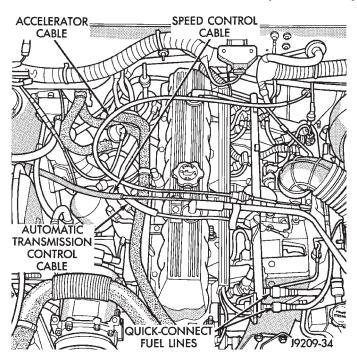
Accelerator Cable, Vehicle Speed Control Cable, Automatic Transmission Control Cable & Quick-Connect Fuel Lines
